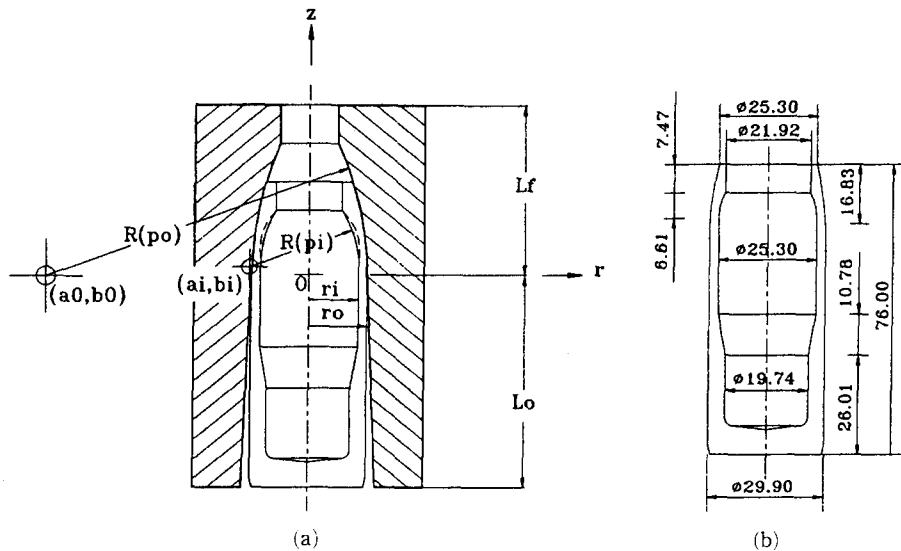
Dimensions and configurations of die and final shell product: (a) die configuration and relevant dimensions, (b) dimensions of the final shell product
